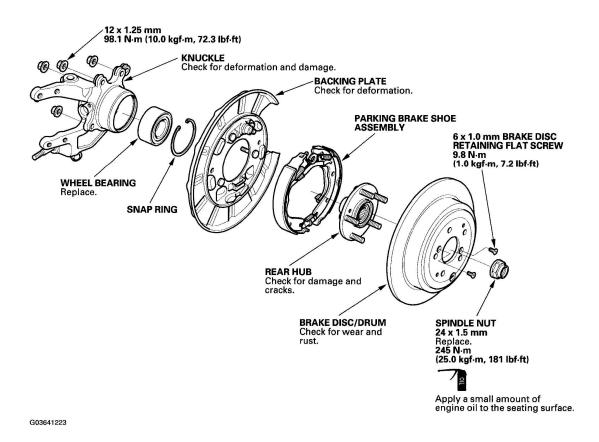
Exploded View Of Knuckle/Hub/Wheel Bearing Courtesy of AMERICAN HONDA MOTOR CO., INC.
